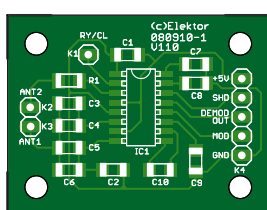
RFID reader PCB for assembling the reader circuit shown in Figure 6.
